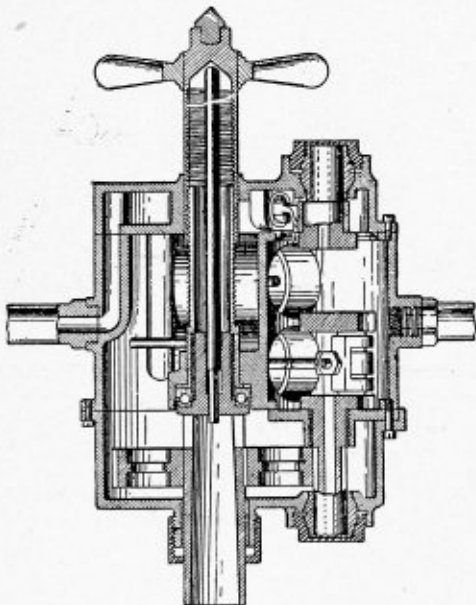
SECTIONAL VIEW OF "LITTLE GIANT" DRILL.
